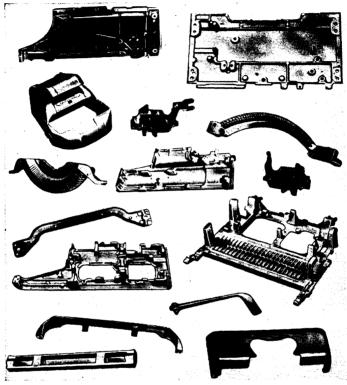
Aluminum die castings for typewriters and other business-machine equipment.
